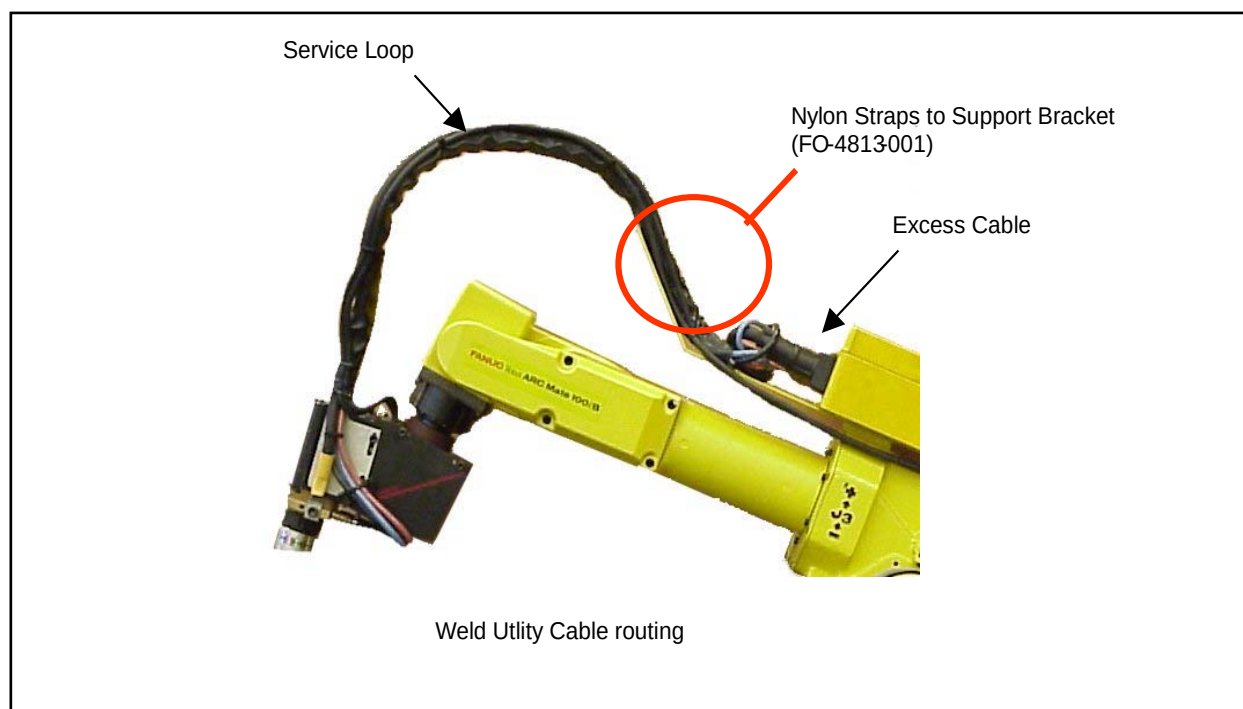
Weld Utility Cable Routing2. Weld Utility Cable Routing
